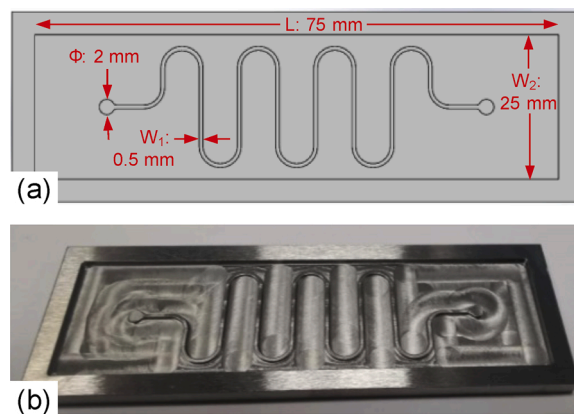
CAD drawing (a) and photo (b) of the tungsten microfluidic mould.
